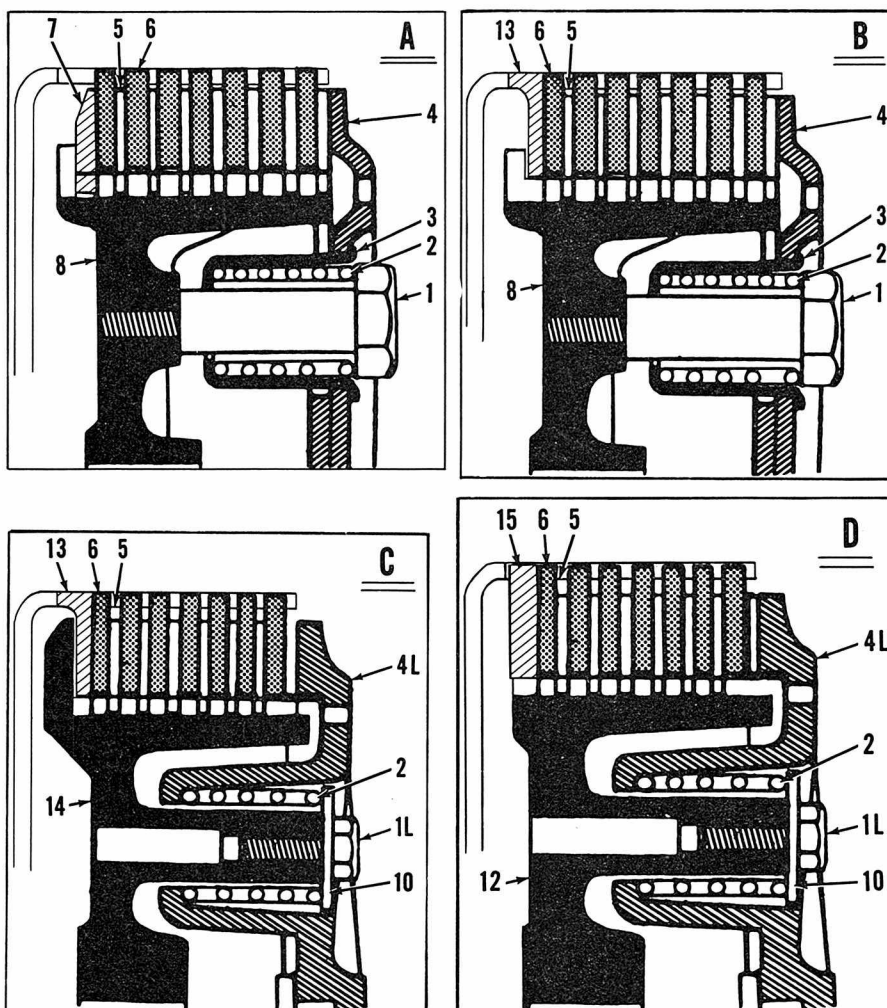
Cross section of clutch assemblies used. Type "A" is early, unmodified type. Type "B" is early type with modification. Type "C" is later type used on some models. Type "D" is view of latest style clutch.
